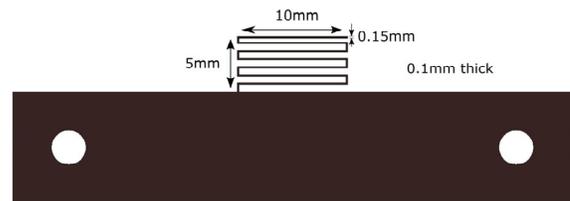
Cross-section of single period of meandered-wire metamaterial with dimensions used in experimental prototype. The bottom portion with holes is used for mounting and construction.
